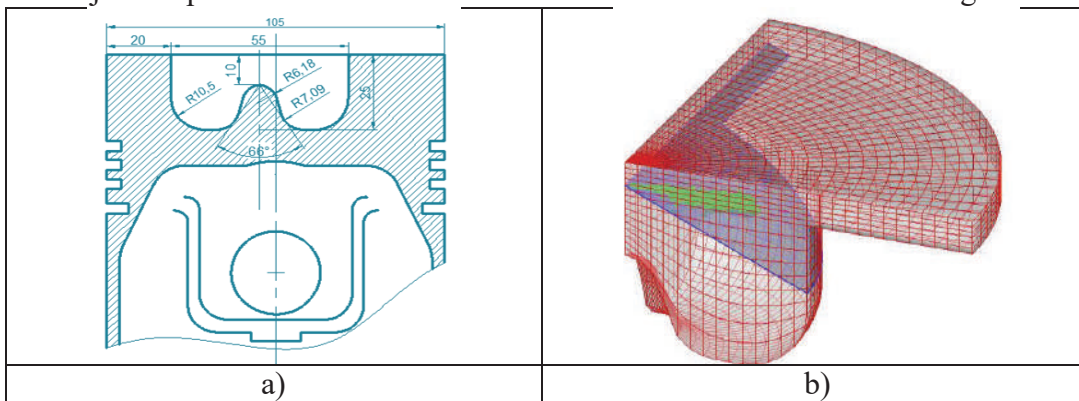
Dimensional drawing of the combustion chamber (a), grid model simulating the fuel injection process (b)
